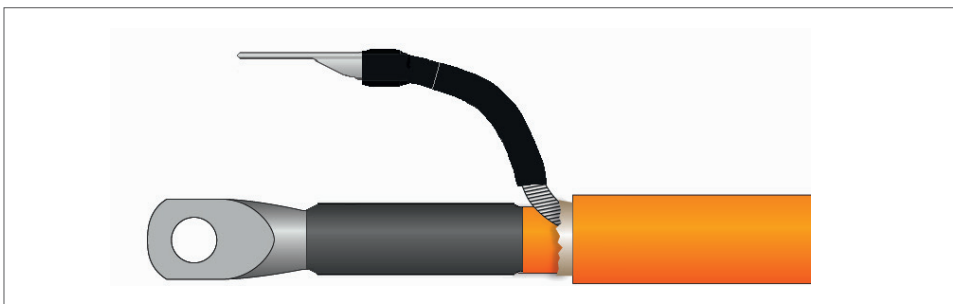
Step 7: Pull the heat-shrink tubing over the ring terminal onto the inner conductor and fix it in place
